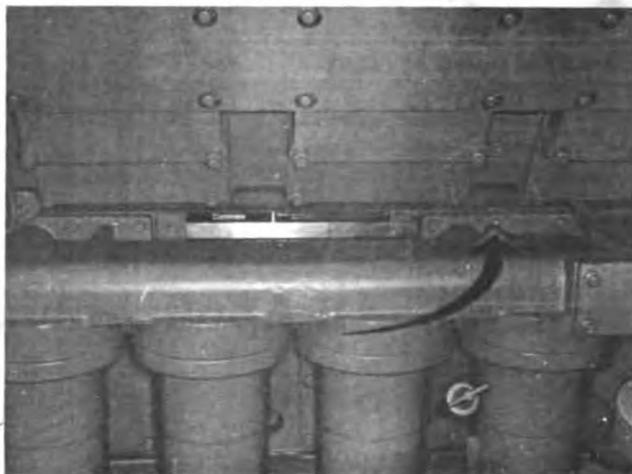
, (K21902). Lubricating system priming point — KT(A)-2300 Engine
